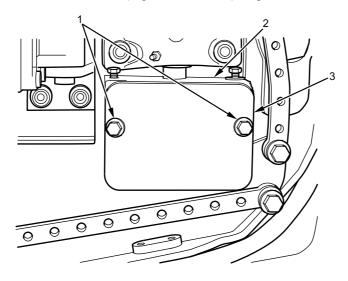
Hex Bolts Installed on Inner Shaft Lock Plate Bracket.
